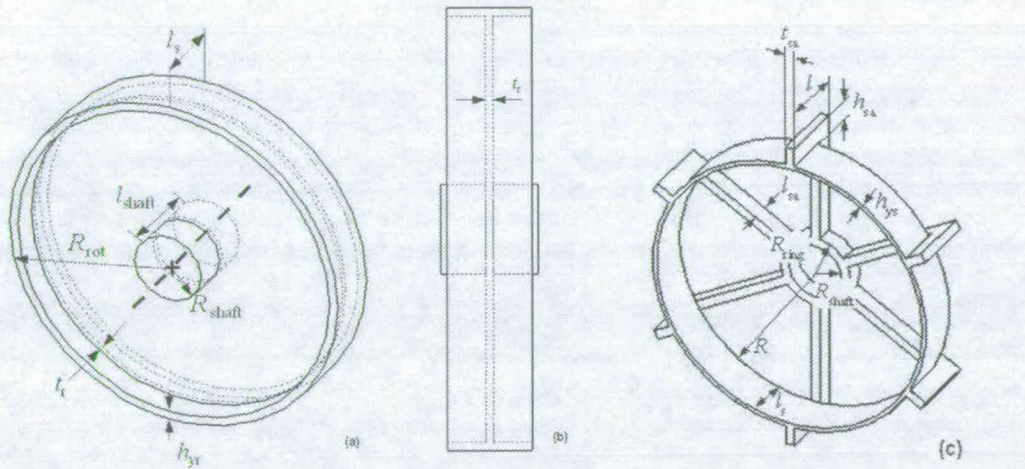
Radial-flux machine models showing dimensions: (a) Rotor; (b) Rotor from side; (c) Stator.
